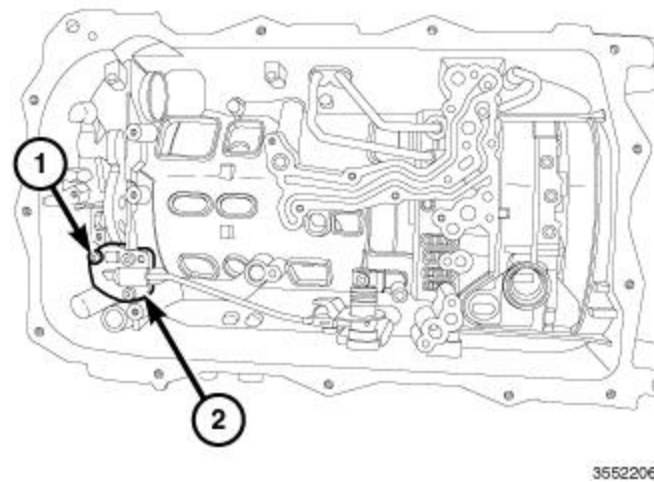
Three Park Pawl Lock Rod Guide Plate Retaining Screws & Plate
